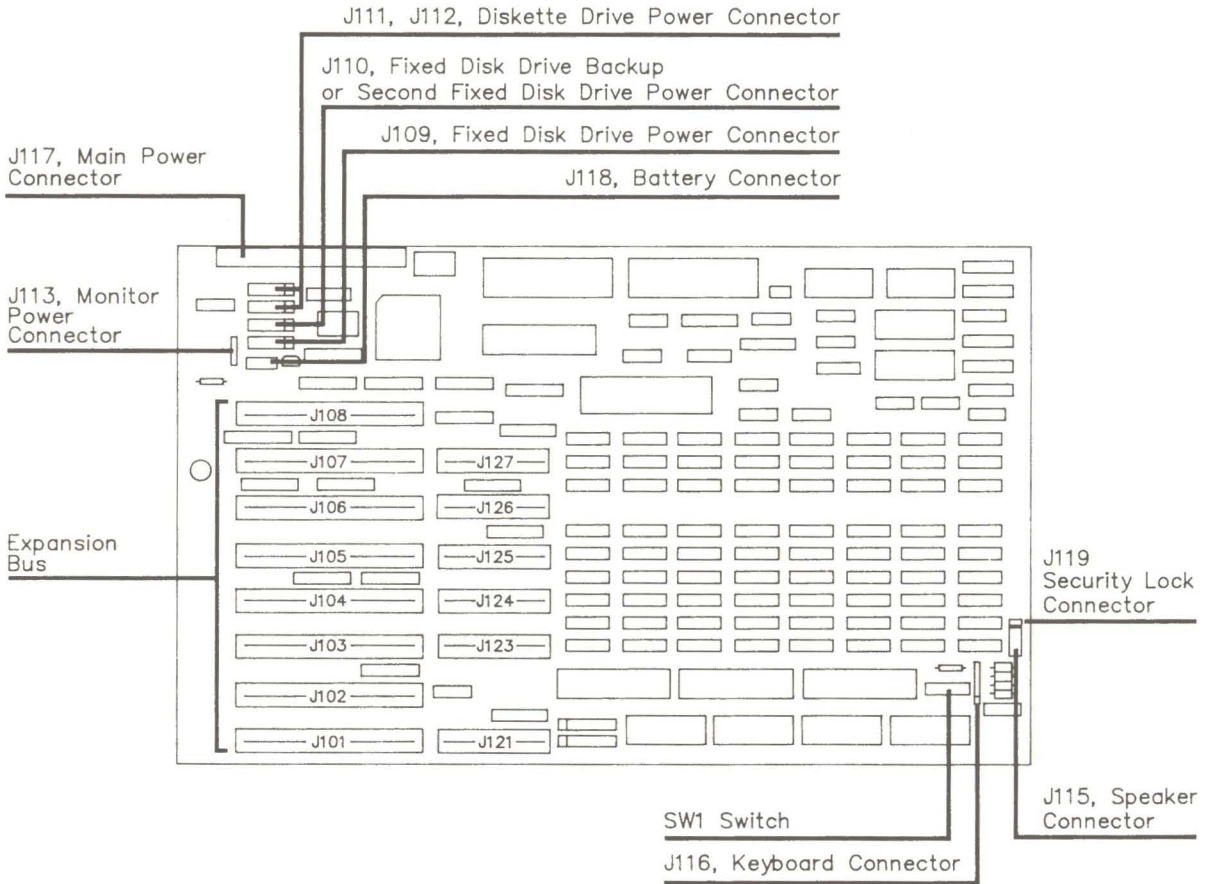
COMPAQ DESKPRO 286 Version 2 System Board Connectors and SW1 Location
